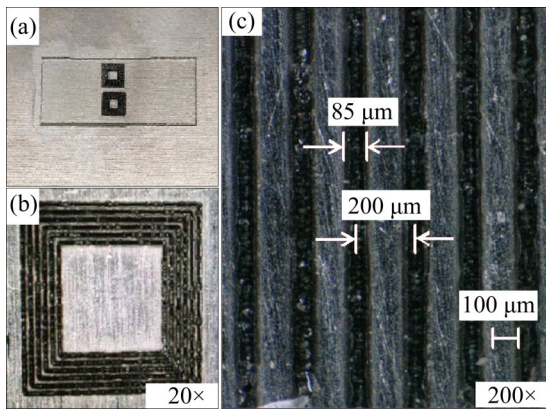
Optical microscope images of the samples after welding: (a) Soda lime glass and Kovar alloy without optical contact are directly welded together by fs laser; (b) Top view of the whole weld area (20× magnification); (c) Zoom-in of the welding line (200× magnification)
